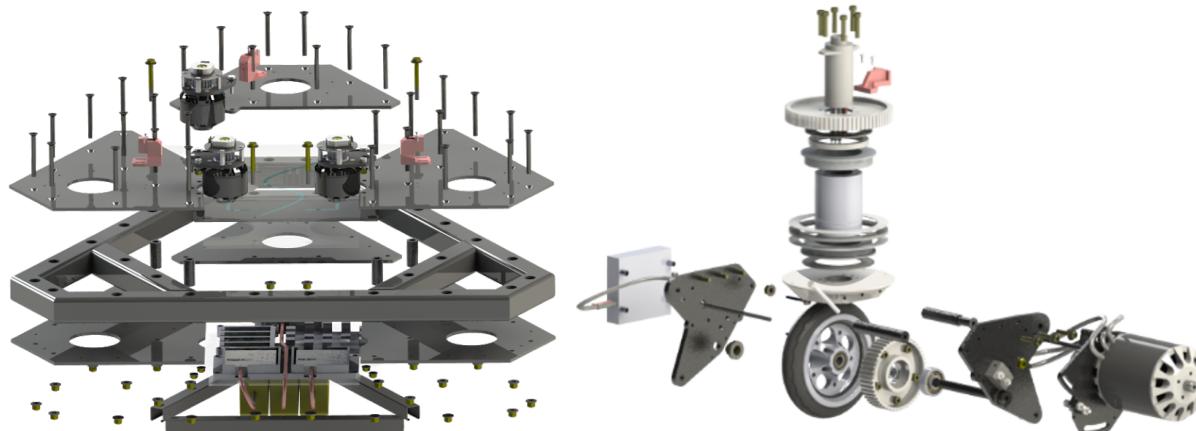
Chassis Assembly Exploded View (Left) and Wheel Assembly Exploded View (Right).
